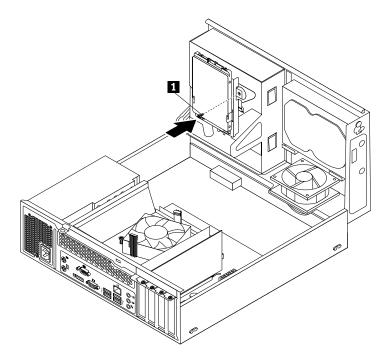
Installing the screw to secure the bracket on the bottom of the optical drive bay
